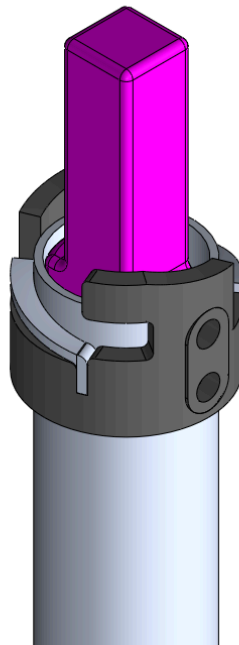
Coupling Mechanism with Square Extrusion for Torque Application
